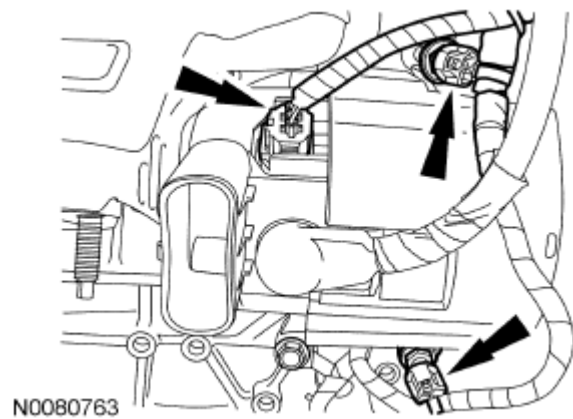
Locating Generator Electrical Connection And Wiring Harness Retainers
